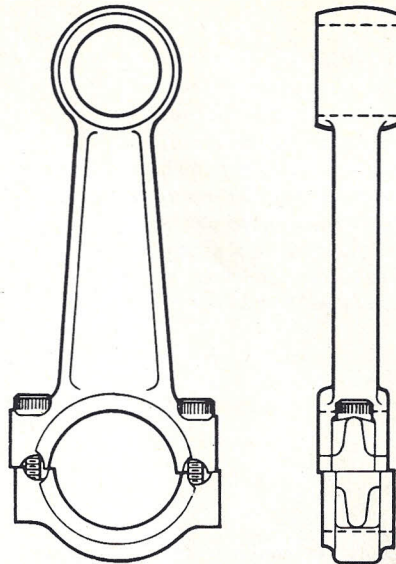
Exaggerated view of cap improperly assembled to connecting rod. When cap is properly assembled to rod, no "catch points" can be felt when fingernail is rubbed against the parting line of rod and cap.
